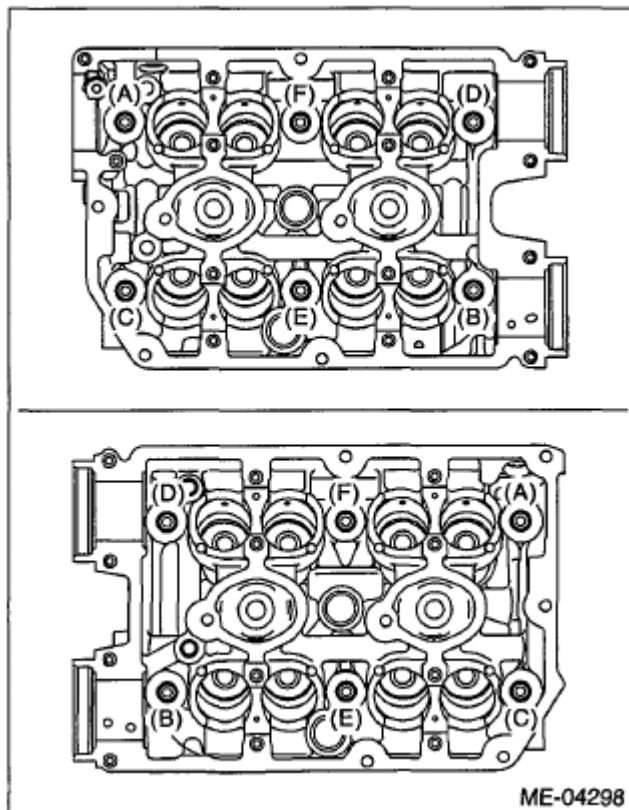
Identifying Cylinder Head Bolts Removing Sequence
